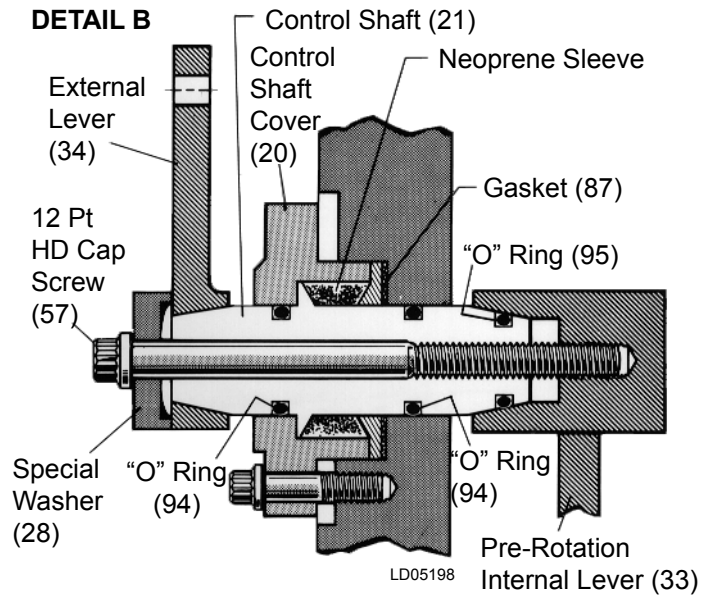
REPLACING CONTROL SHAFT ASSEMBLY
